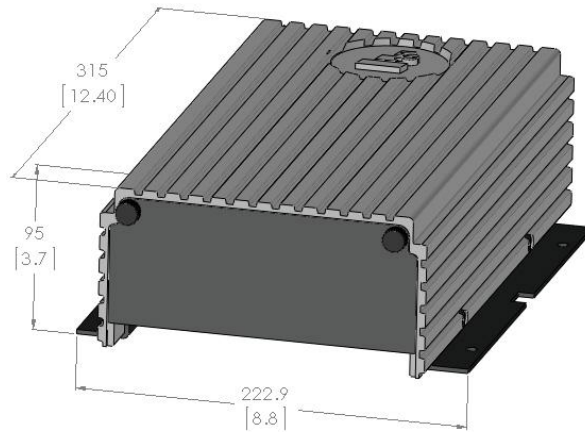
Cross-Band Simplex Only Capable - Dimensions mm / [in]
